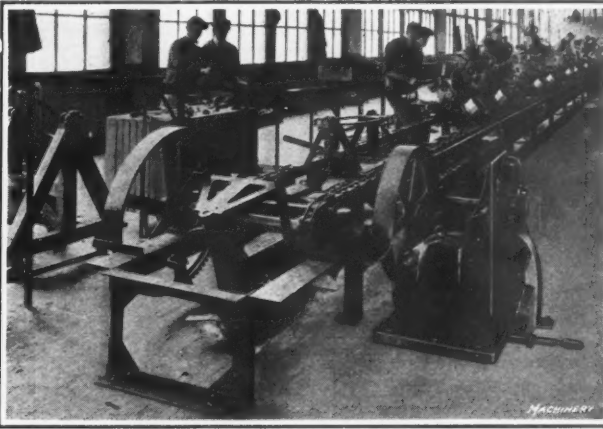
Formerly the Packard Motor Car Co. assembled clutch units on stands that were distributed over the floor of the clutch assembling department. The Palmer-Bee Co. suggested that the progressive method of assembly be employed in handling them, so a conveyor system was installed, which carries stands similar to those formerly employed
